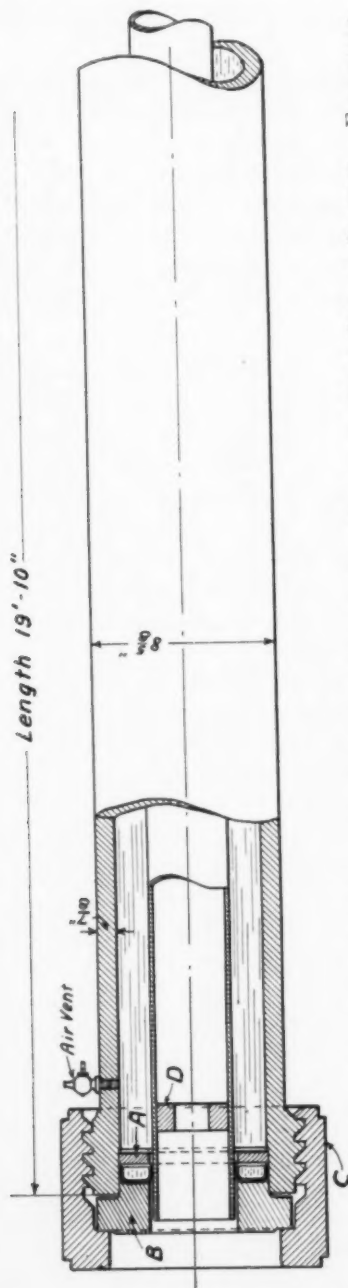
EIGHT-INCH HYDRAULIC TEST CYLINDER, SHOWING EXPERIMENTAL TUBE WITH OPEN ENDS IN POSITION. ESPECIALLY DESIGNED AND CONSTRUCTED FOR COLLAPSING TESTS ON TUBES CONDUCTED BY PROF. R. T. STEWART.
